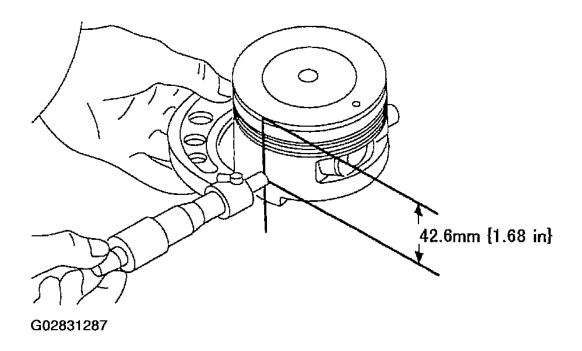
Measuring Piston Outer Diameter Courtesy of MAZDA MOTORS CORP.
